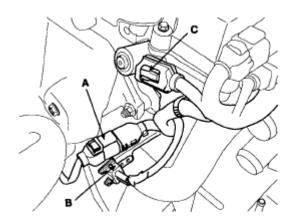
Identifying Ignition Coil Connector Courtesy of HYUNDAI MOTOR CO.
